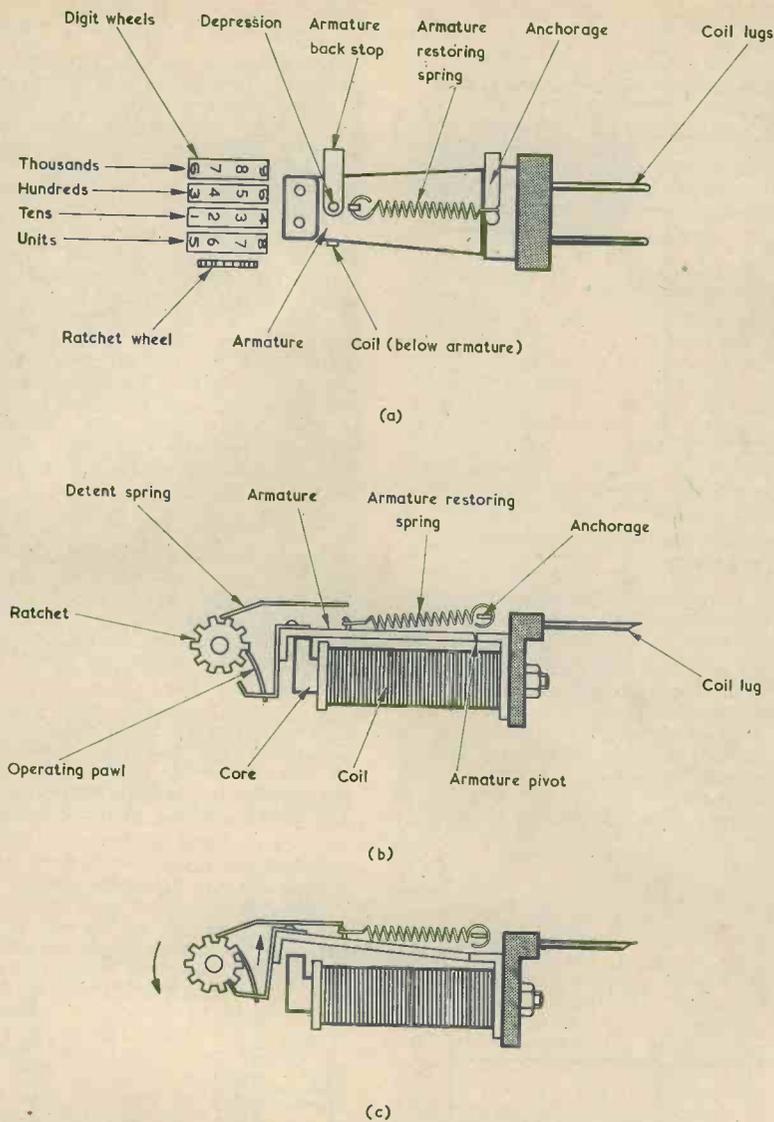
(a). Top view of the counter mechanism, showing in particular the digit wheels
